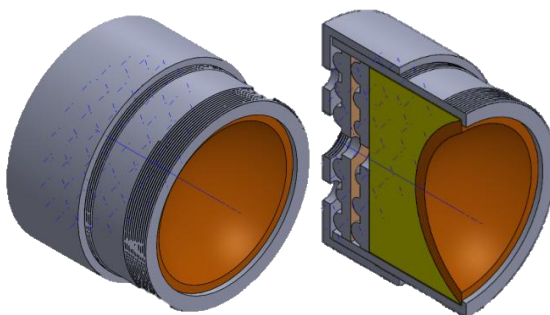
The warhead with the attachment element: isometric view (left) and cutted isometric view (right)
